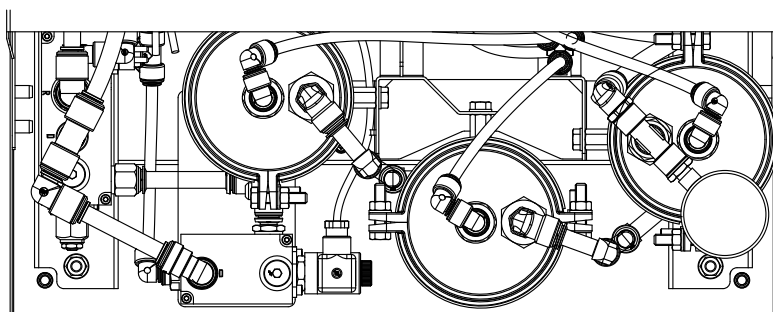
Alignment of the membrane tube cover RO-E 300(+) with pressure gauge, view from above
